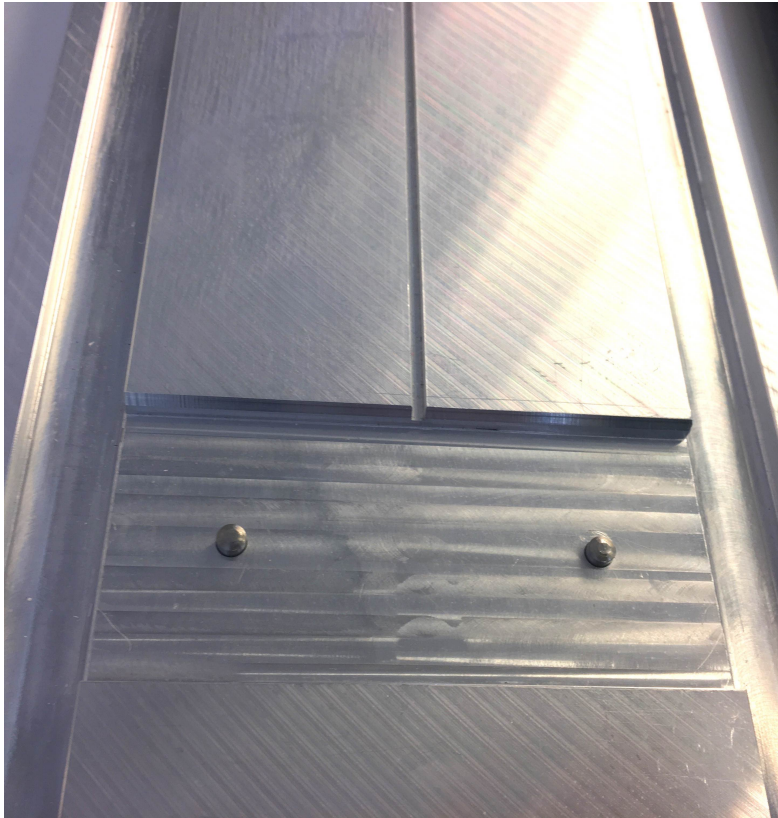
Geometry template. Placing the fibre mat into the jig makes sure that it will fit into the module template as well.
